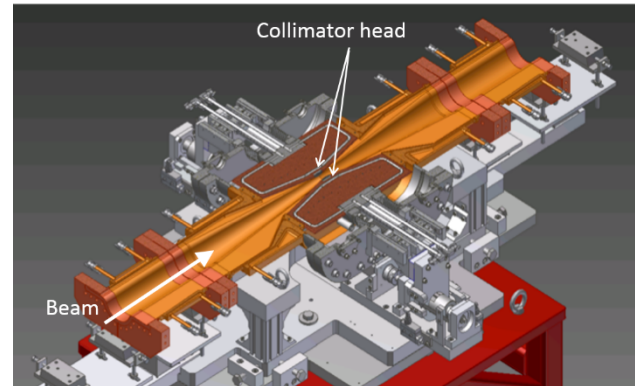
Conceptual structure of new beam collimator (horizontal type).
